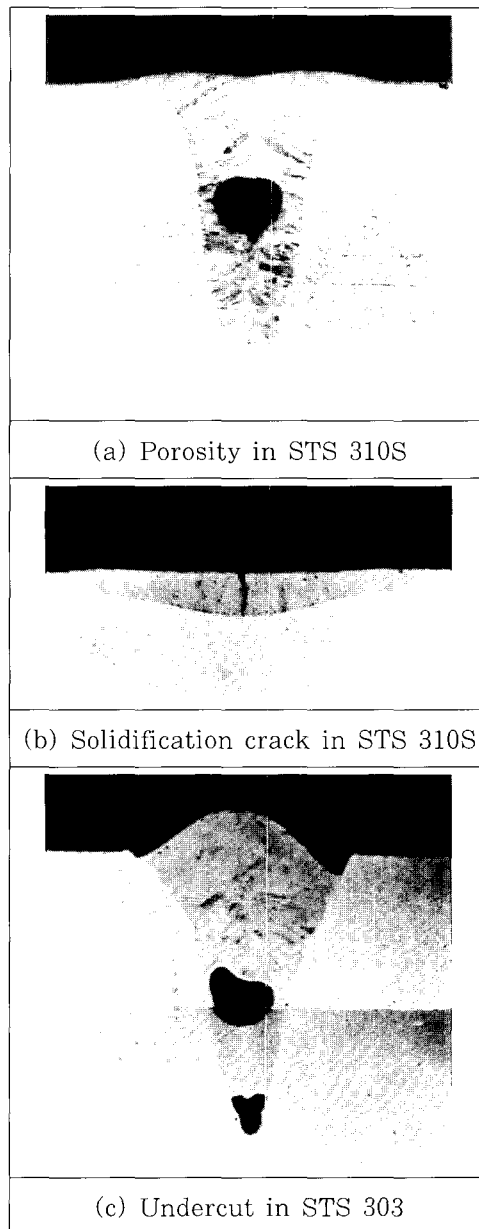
Typical weld defects observed in pulse laser-welded stainless steels.
